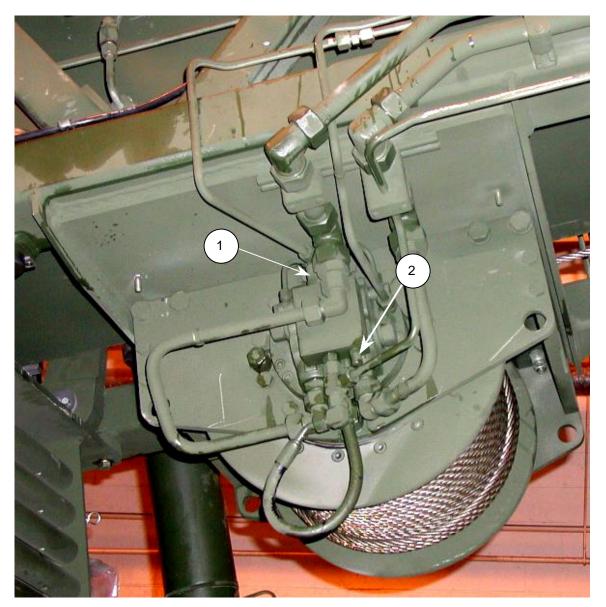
38 Lower Winch Pilot Valve Adjustment
